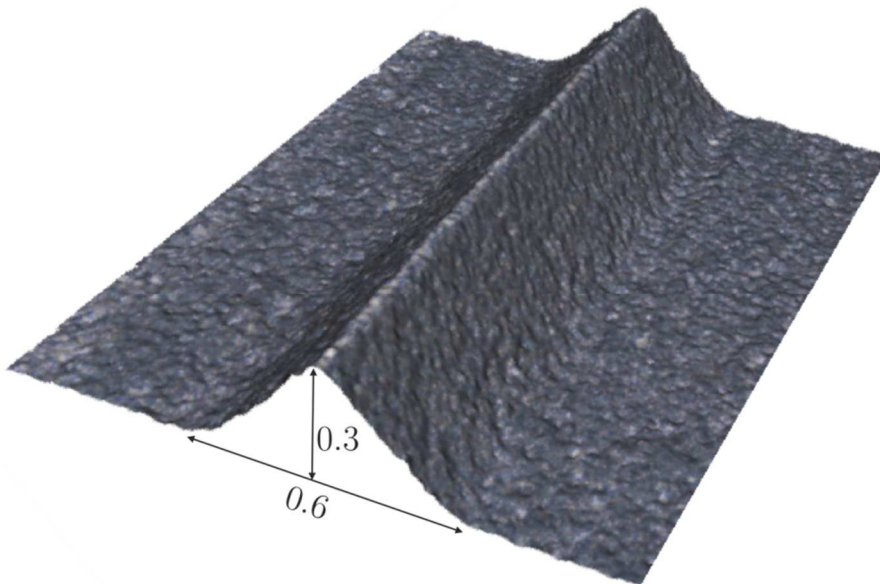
3D picture of the D16 metal bonded grinding wheel used for grinding the wire guide groove
